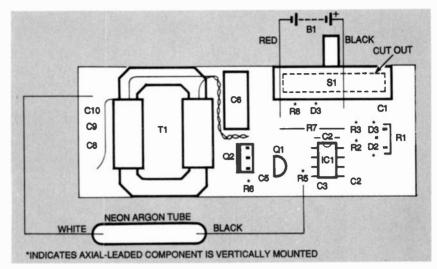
DRIVER CIRCUIT PARTS PLACEMENT DIAGRAM. The circuit can be built by point-to-pont wiring on 0.1-inch grid perforated board. Transformer T1 is a non-standard component.
